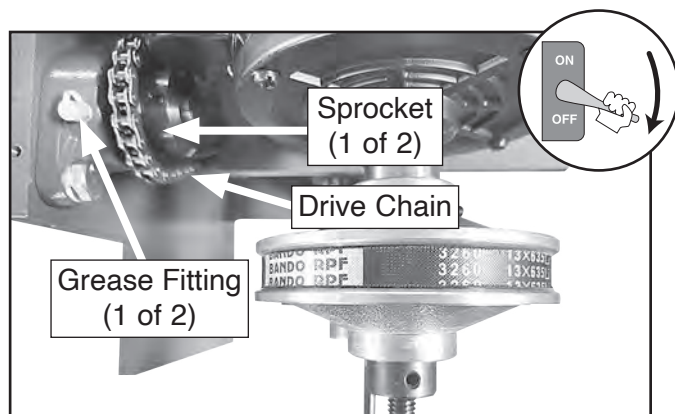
Location of conveyor drive chain, sprocket, and bearing grease fitting.
